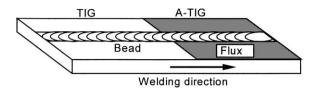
Schematic representation of the specimen used in the TIG/ATIG welding trials.
